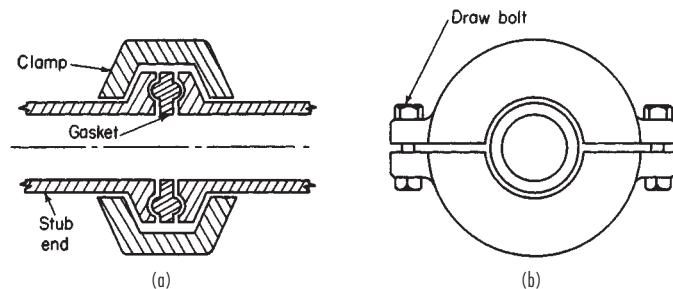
V-clamp joint. (a) Section. (b) End view.
